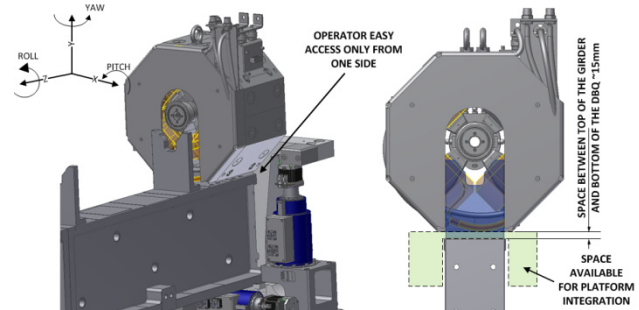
View of DBQ typical assembly geometry on the supporting girder.
